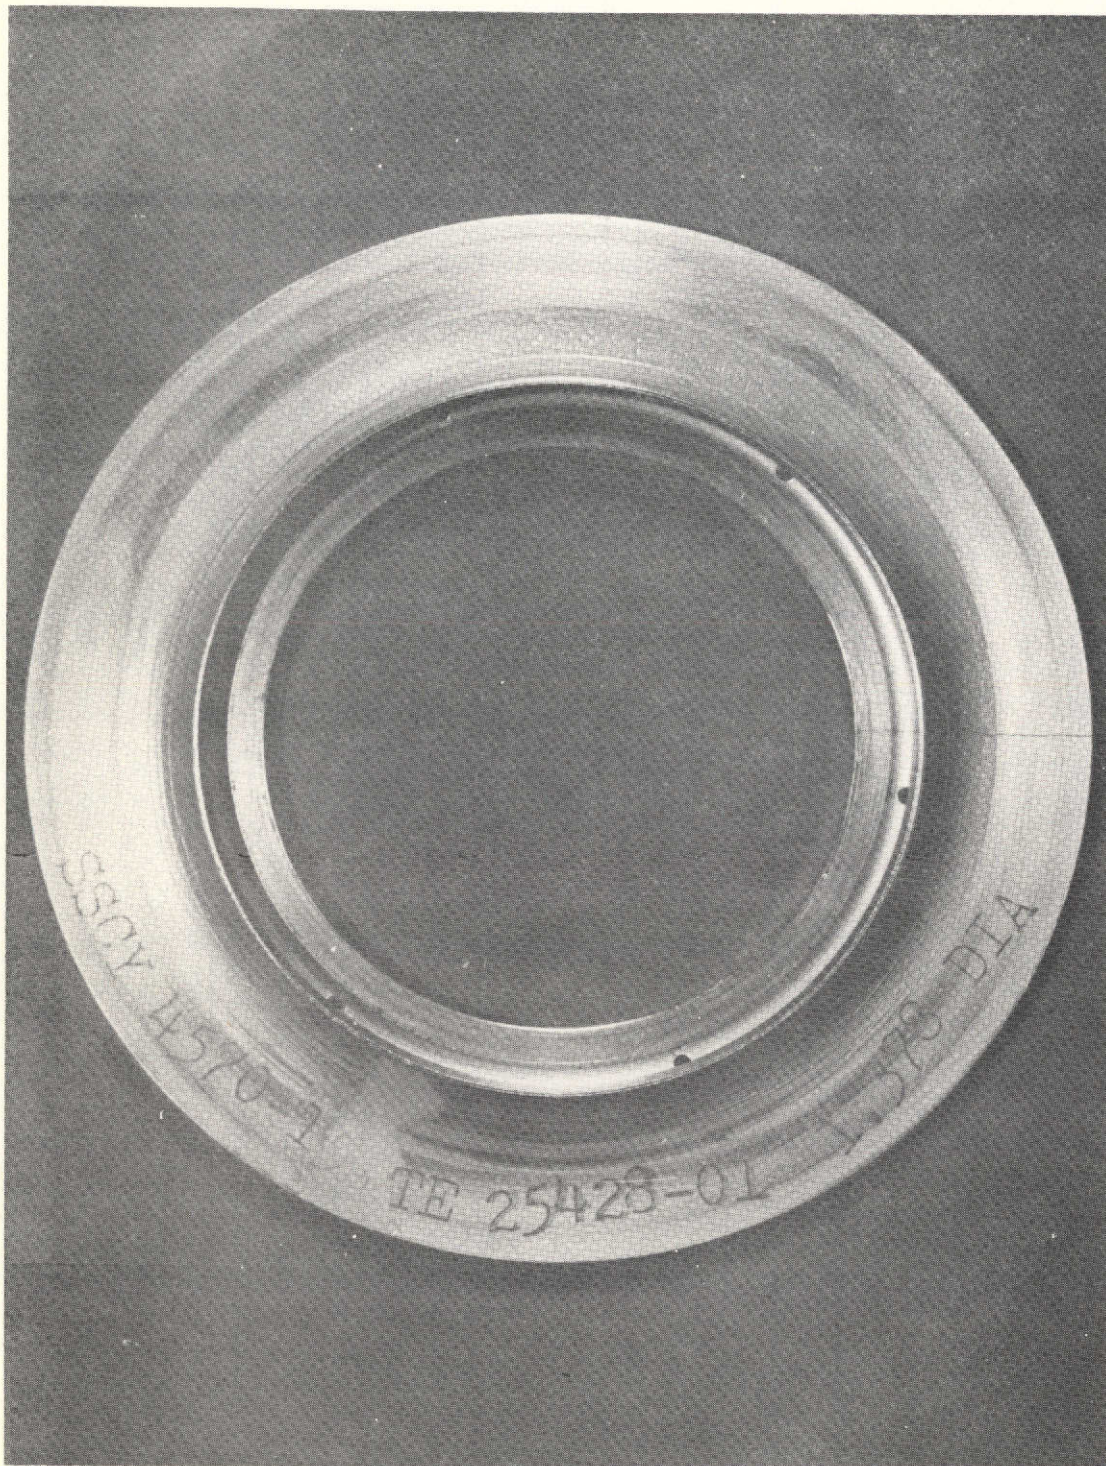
Cracked Oil Dam and Heat Shield, Oil Side.
